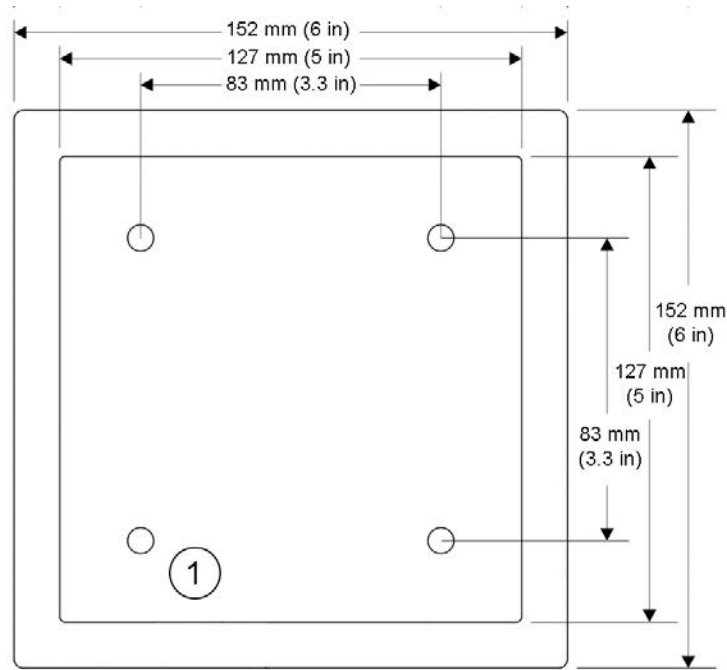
RDP-110C Mounting Dimensions (Rear Panel)
